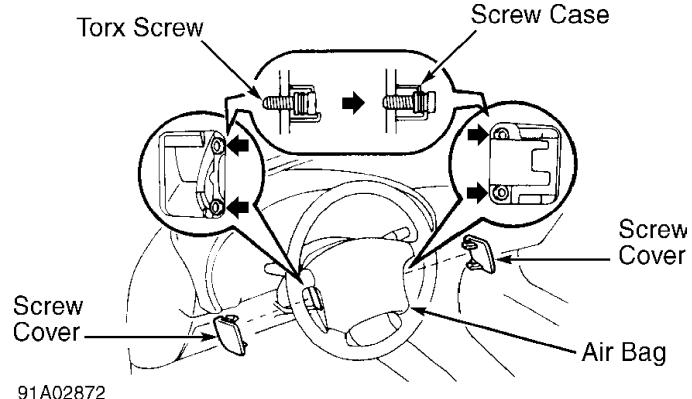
Removing Steering Wheel Pad Courtesy of Toyota Motor Sales, U.S.A., Inc.
